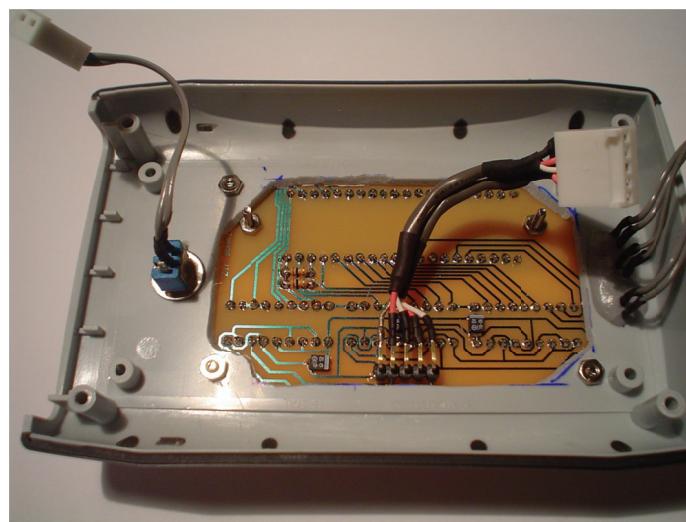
Inner side of top panel. The large cut exposes the copper area and SMD components, as well as the connector that links to the main board (shielded). R1 and R2 are also mounted on this side.
